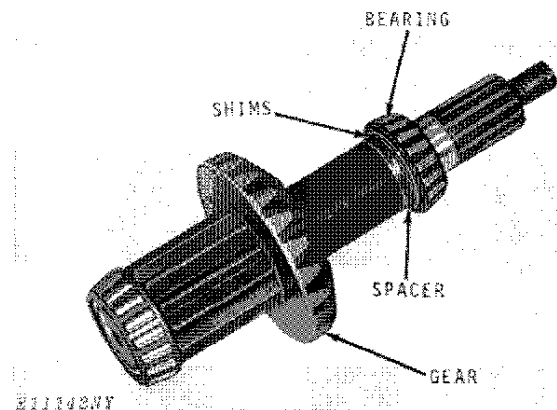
Installing Gear and Bearings on Flywheel Shaft
